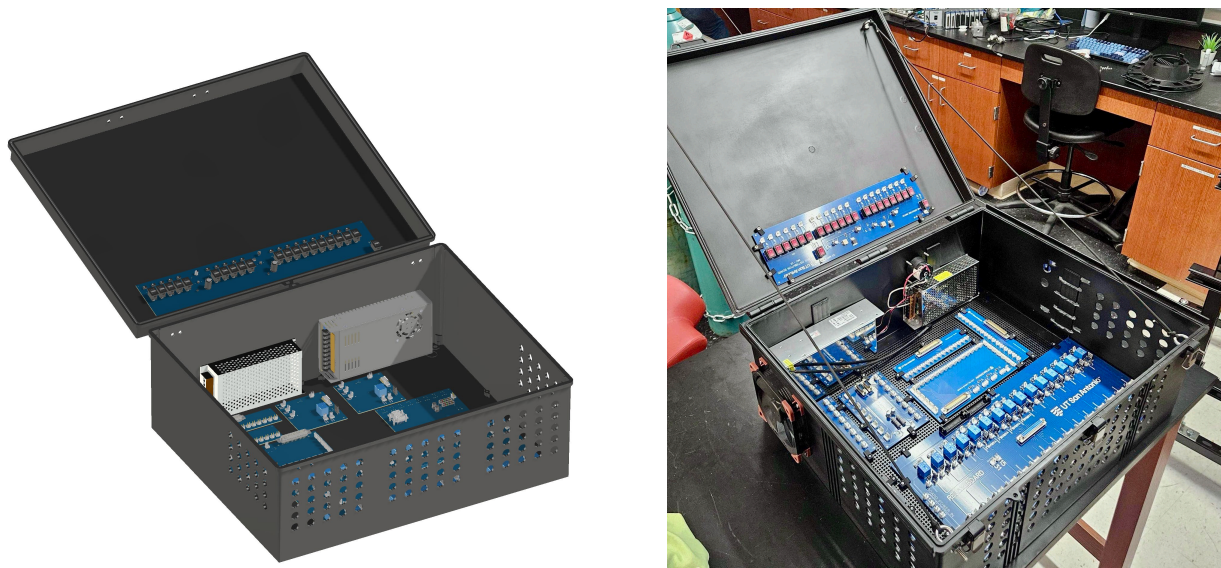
CAD render of PCBs within electronics box (left), as-built (right)
